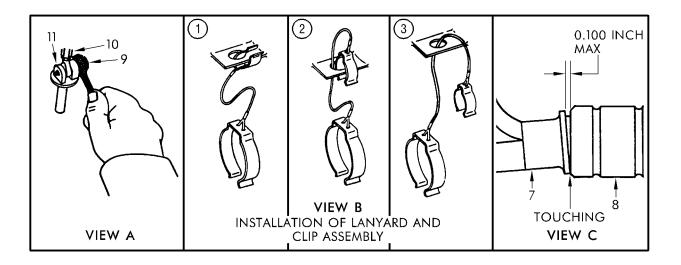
Anti-Icing Bleed and Start Valve; Removal and Inspection (Sheet 1 of 2)
